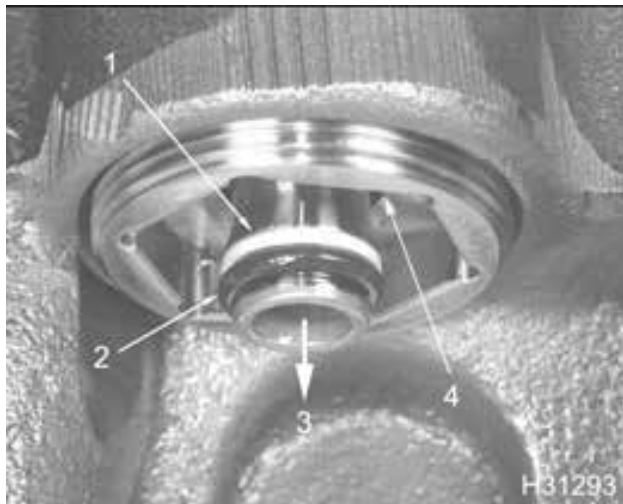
Injector oil inlet adapter in high-pressure oil rail
